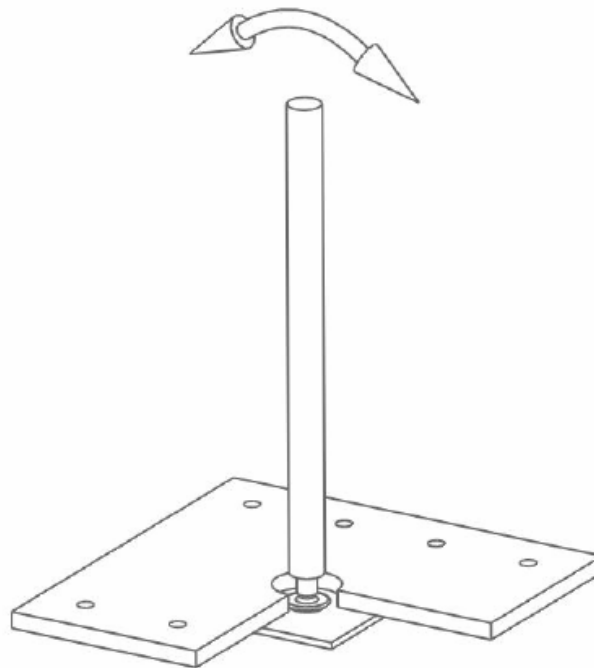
Weld nugget from drawn arc stud welding during Bend test
